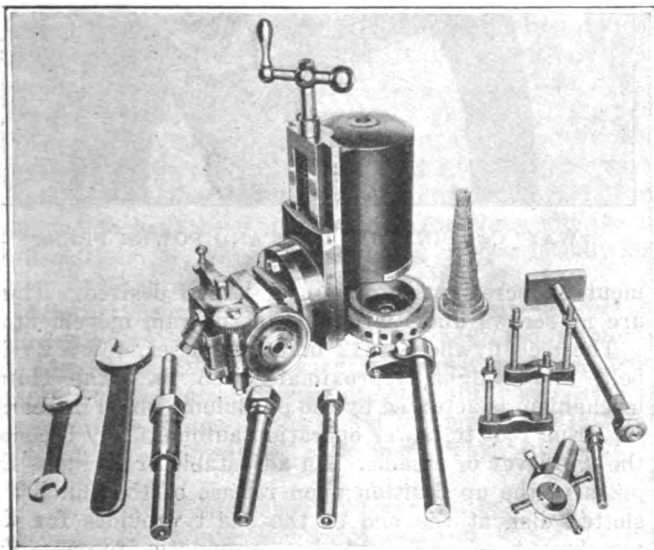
PARTS OF "MILLERETTE" ATTACHMENT
